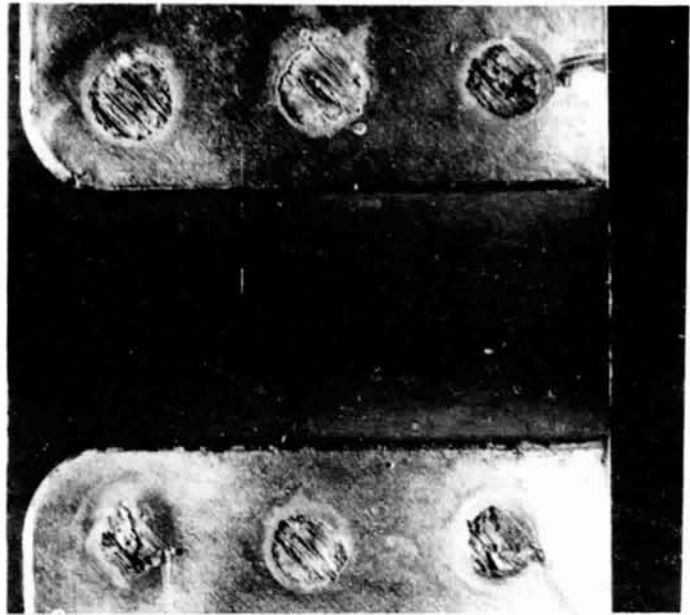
Failed Spotwelded Web Splice Test Specimen (136409)
